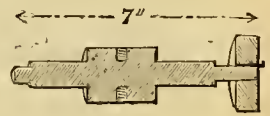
SECTION ACROSS SPINDLE AND COLLAR, SHOWING HOLE FOR SHANKS OF BLADES.
